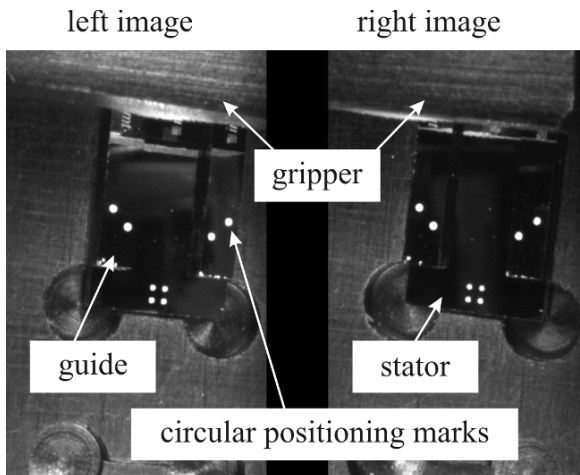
View from the 3D vision sensor of the micro linear stepping motor
